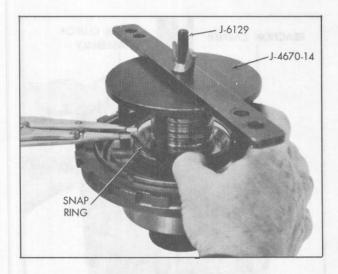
Removing Intermediate Clutch Snap Ring
